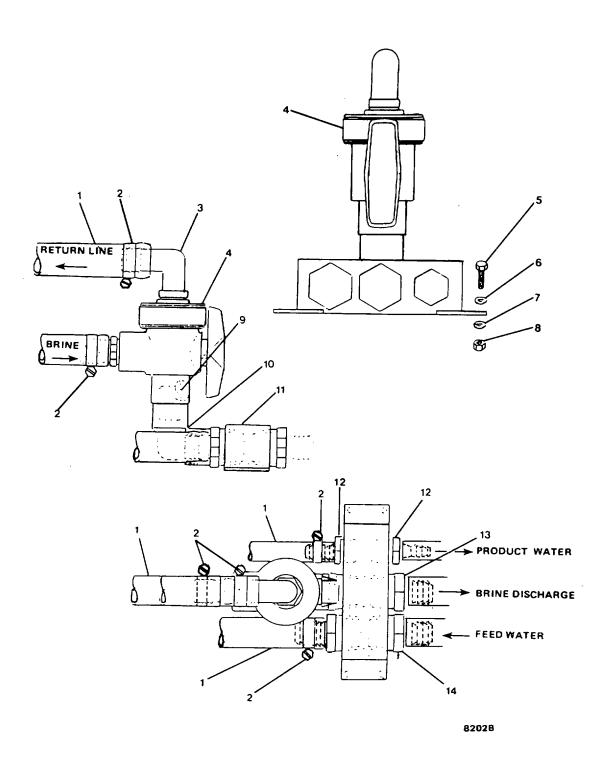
Cleaning Valve Assembly Repair (Sheet 2 of 2).
